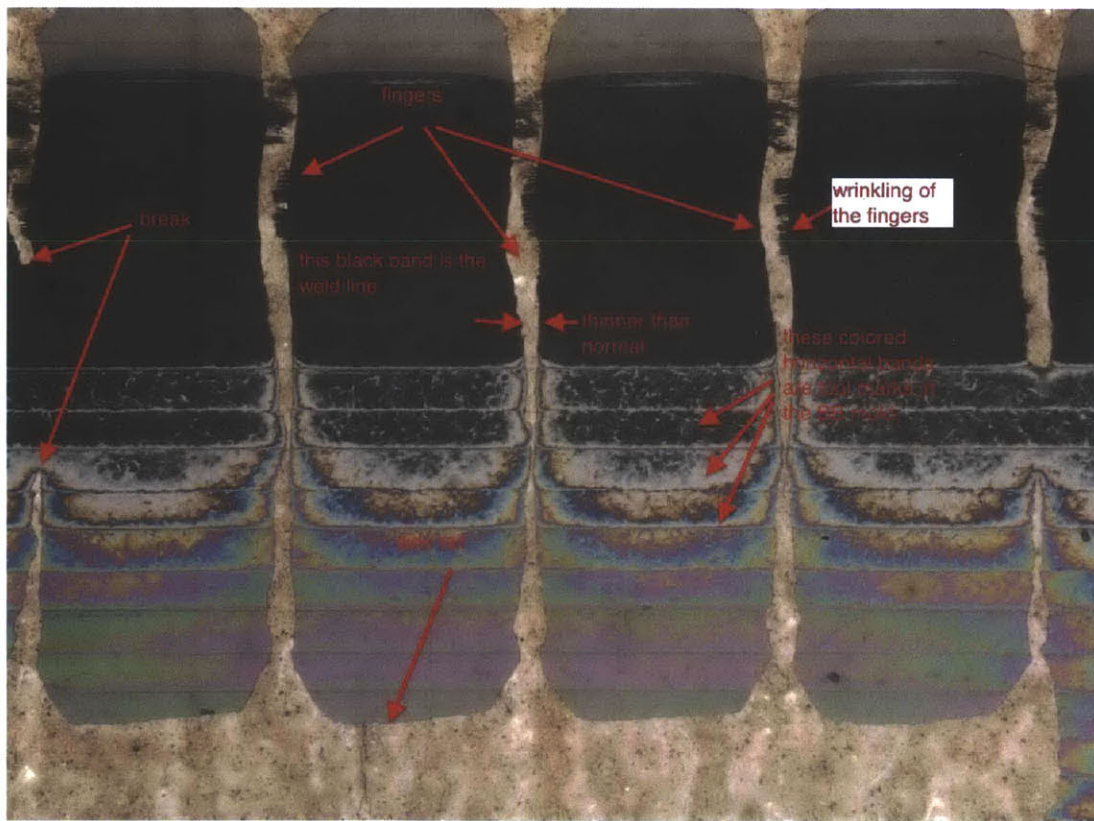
An electrode with obvious defects after weld processing.
